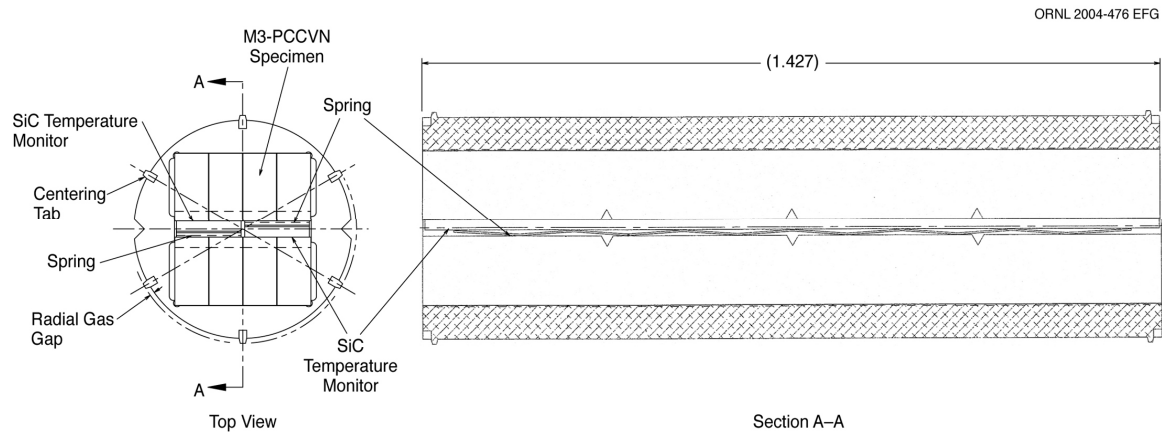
Specimen holder subassembly used for M3-PCCVN specimens.
